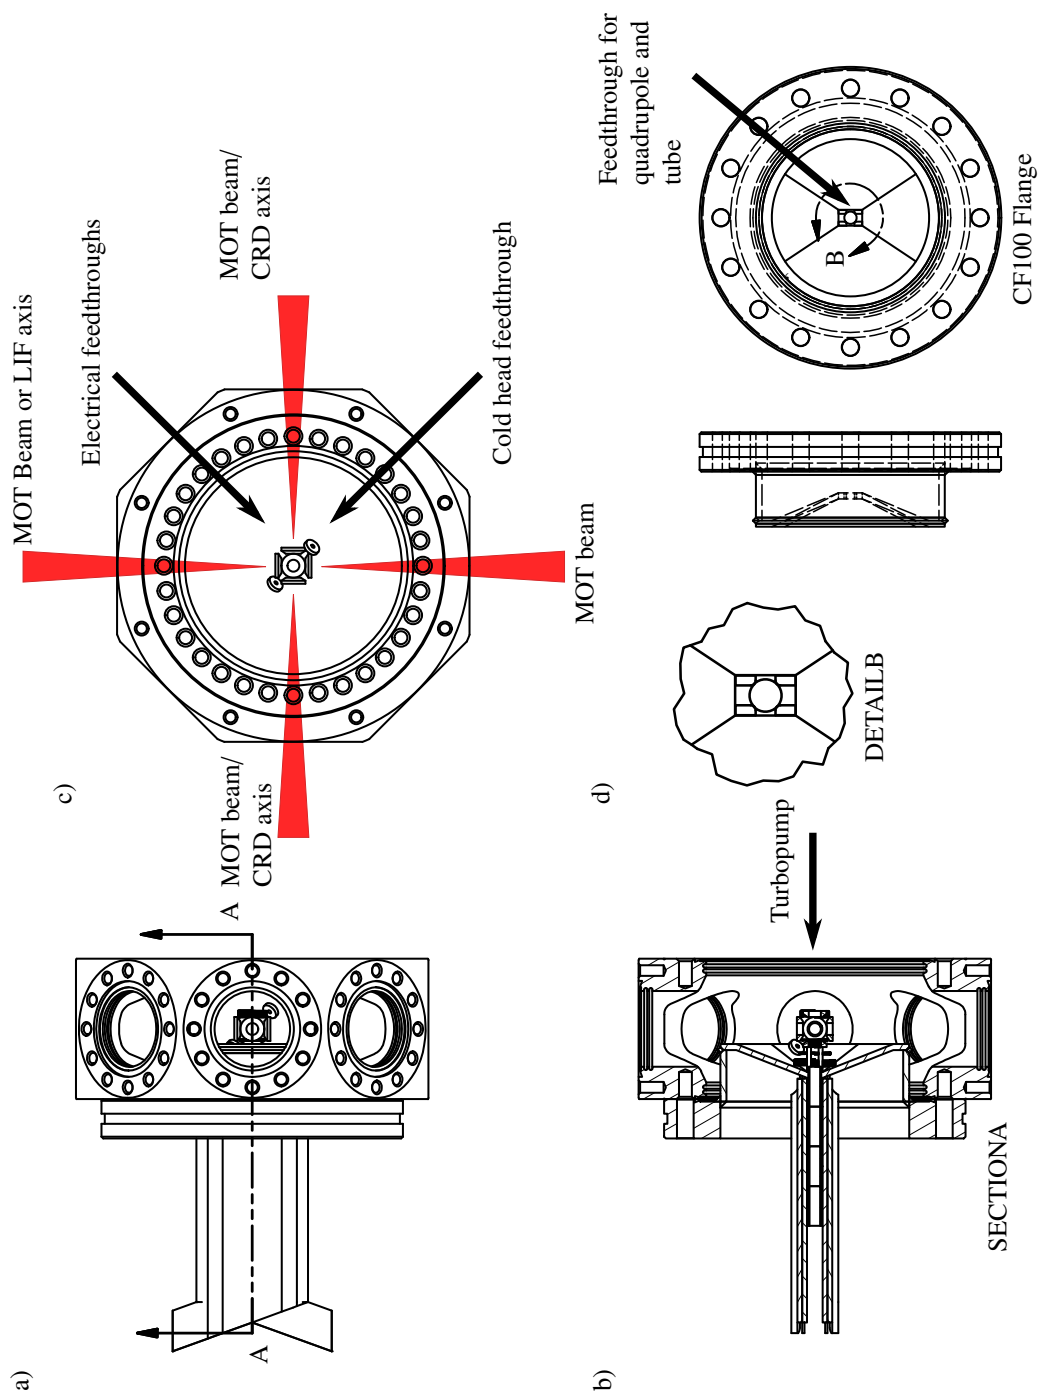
An annotated drawing of the proposed vacuum system, labelled with the required pieces of equipment. Panel a) shows the xz view of the proposed change and custom flange to place the decelerator coils near to the trap. This view shows that the flange does not interfere with the optical axis into the trap. The cross-section of this is shown in panel b). This view demonstrates how the flange sits in the recess of the helical coils. The diagram labelled with the direction that the turbopump will be mounted. View c) shows the xy view of the chamber with the trap in the centre. The MOT axes, the LIF axis, and the CRD axes have been labelled. A possible feedthrough for the cold head and electrical connections have also been labelled. Panel d) shows the views of the flange. The large interior of the flange allows the electrical connection for the helical coils to be made and provides room for the mechanical mounts of the coil. The feedthrough of the permanent magnet quadrupole and stainless steel tube is also shown. These components can be sealed to the flange with torseal.
